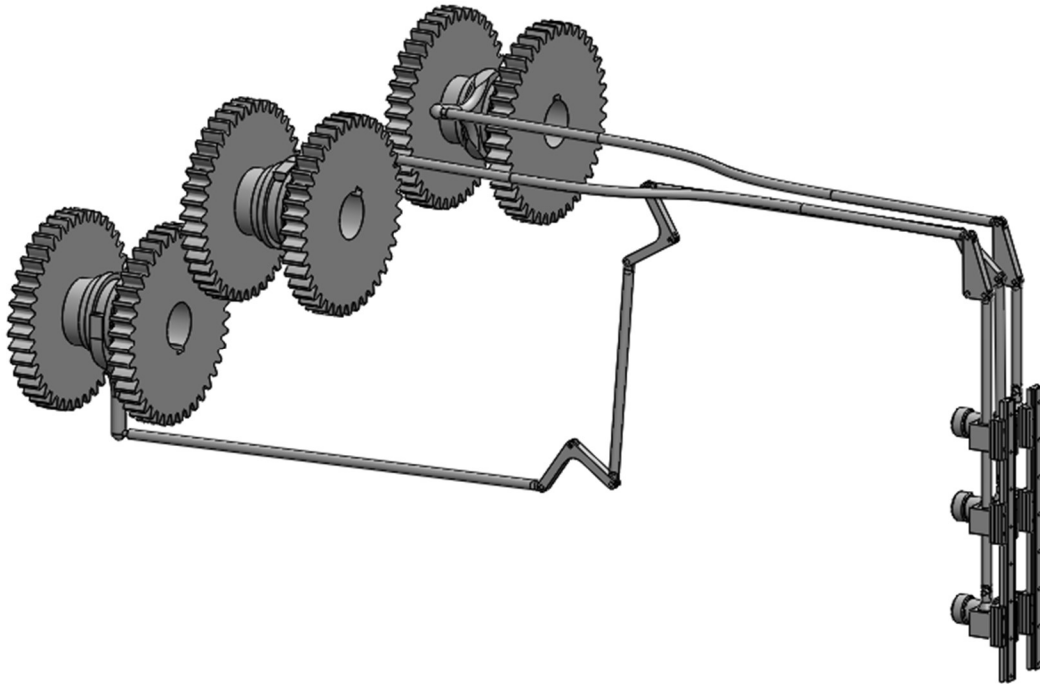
Enlarged SolidWorks rendering of cam follower and shifting gear mechanism.
